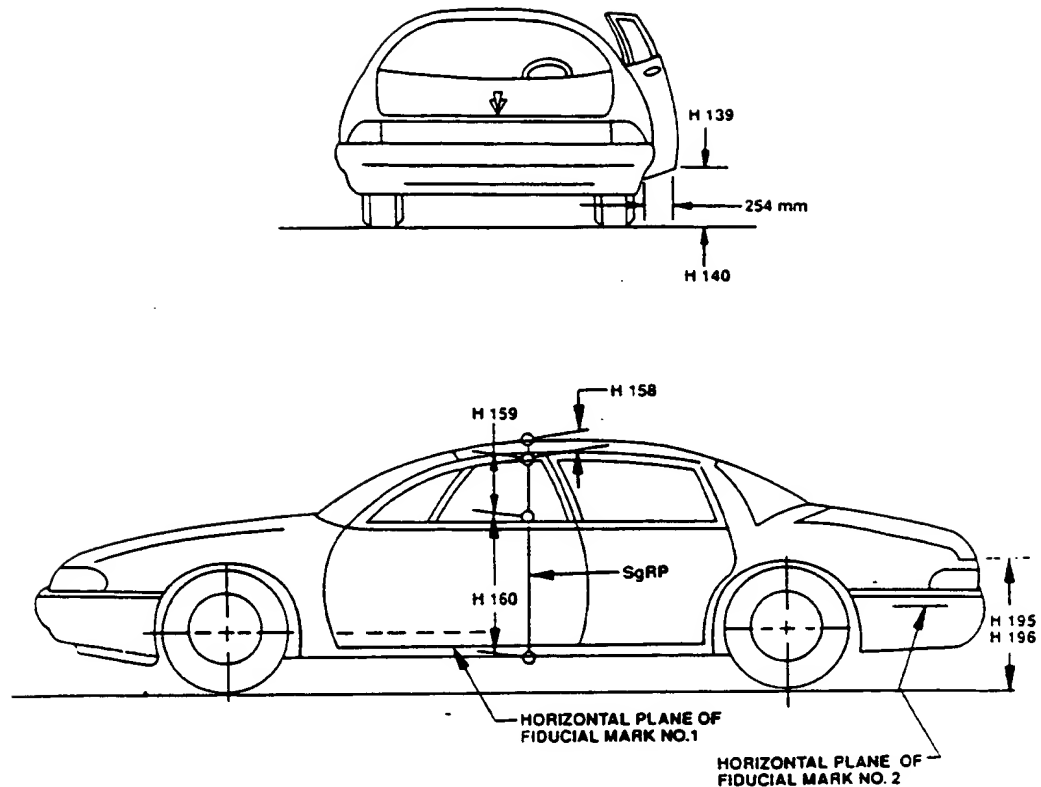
EXTERIOR DIMENSIONS, HEIGHT
